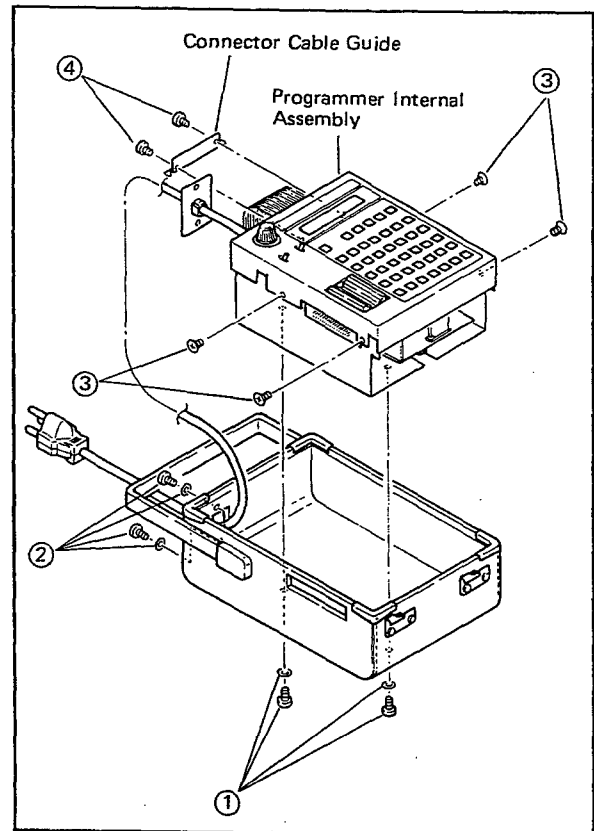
Model SPRG Programmer Disassembly Drawing - 1.
